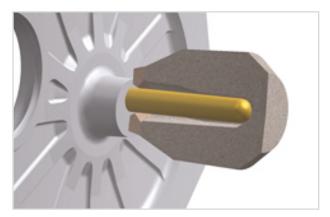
Casting with isolated boss fed by a spot feeder with sand breaker core
